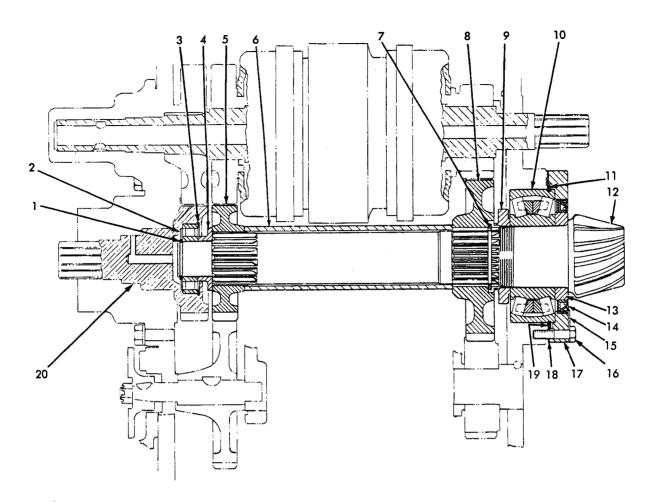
Bevel Pinion Shaft (T-35127)
